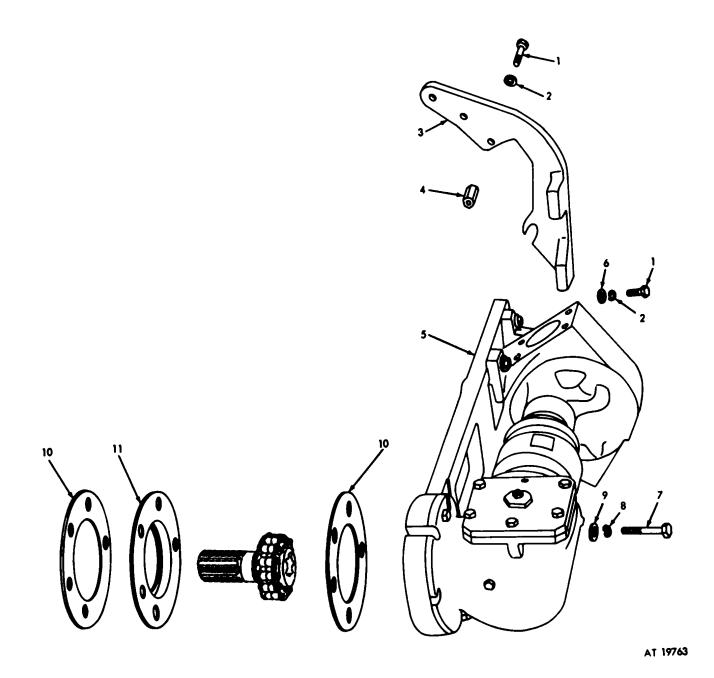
Hydraulic pump and mount assembly, sprocket assembly and related parts - partial exploded view.
